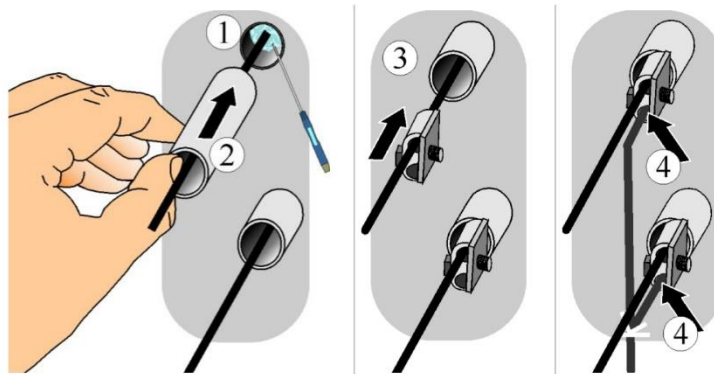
Seal and insert the ceramic feedthrough tube (similar to picture)
